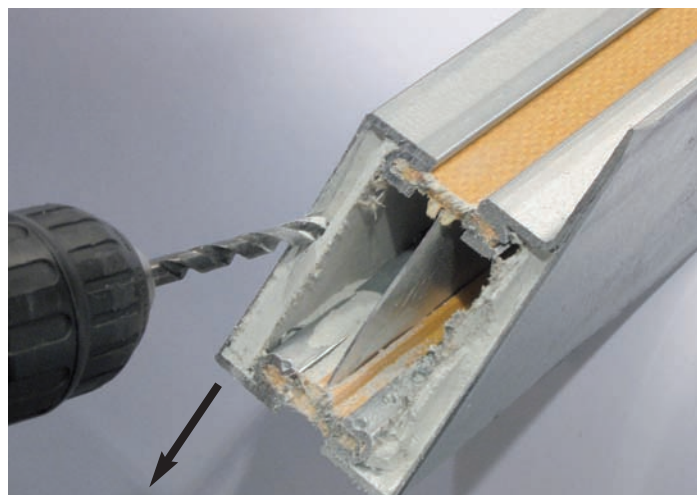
Freeing the weld seam of Janisol 2 fire protection profiles using a drill bit
